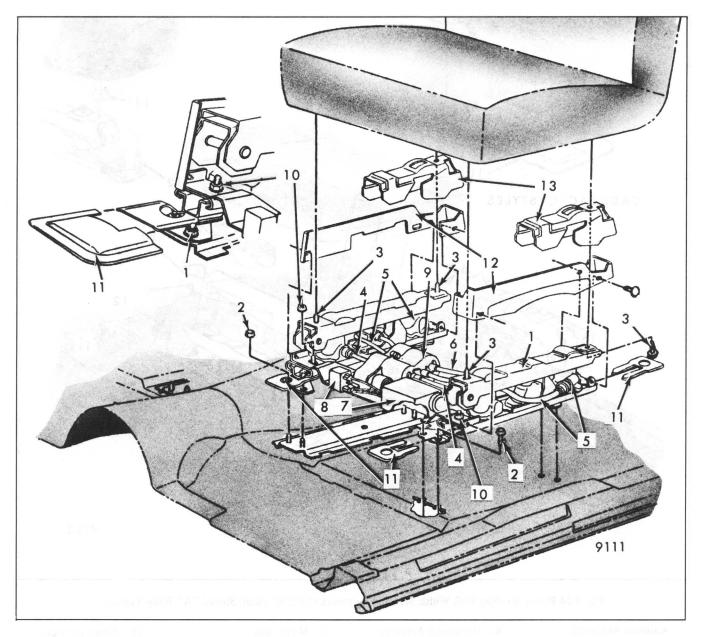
, 50-50, 40-40 Driver's Seat and Six-Way Power Adjusters (60-40 Driver's Seat Shown - Passenger Seat, 50-50 and 40-40 Seats Typical)
